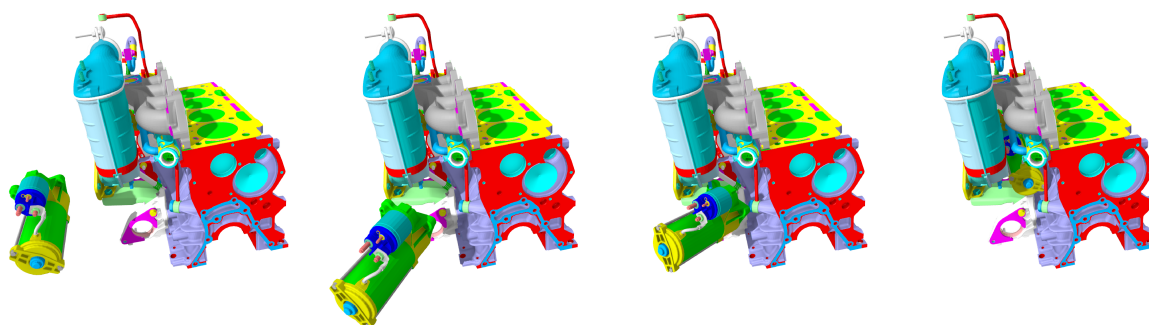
Virtual assembly of complex geometry: insertion of a car starter motor into the engine.
